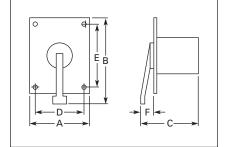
Approximate Dimensions Cavity Mounting
